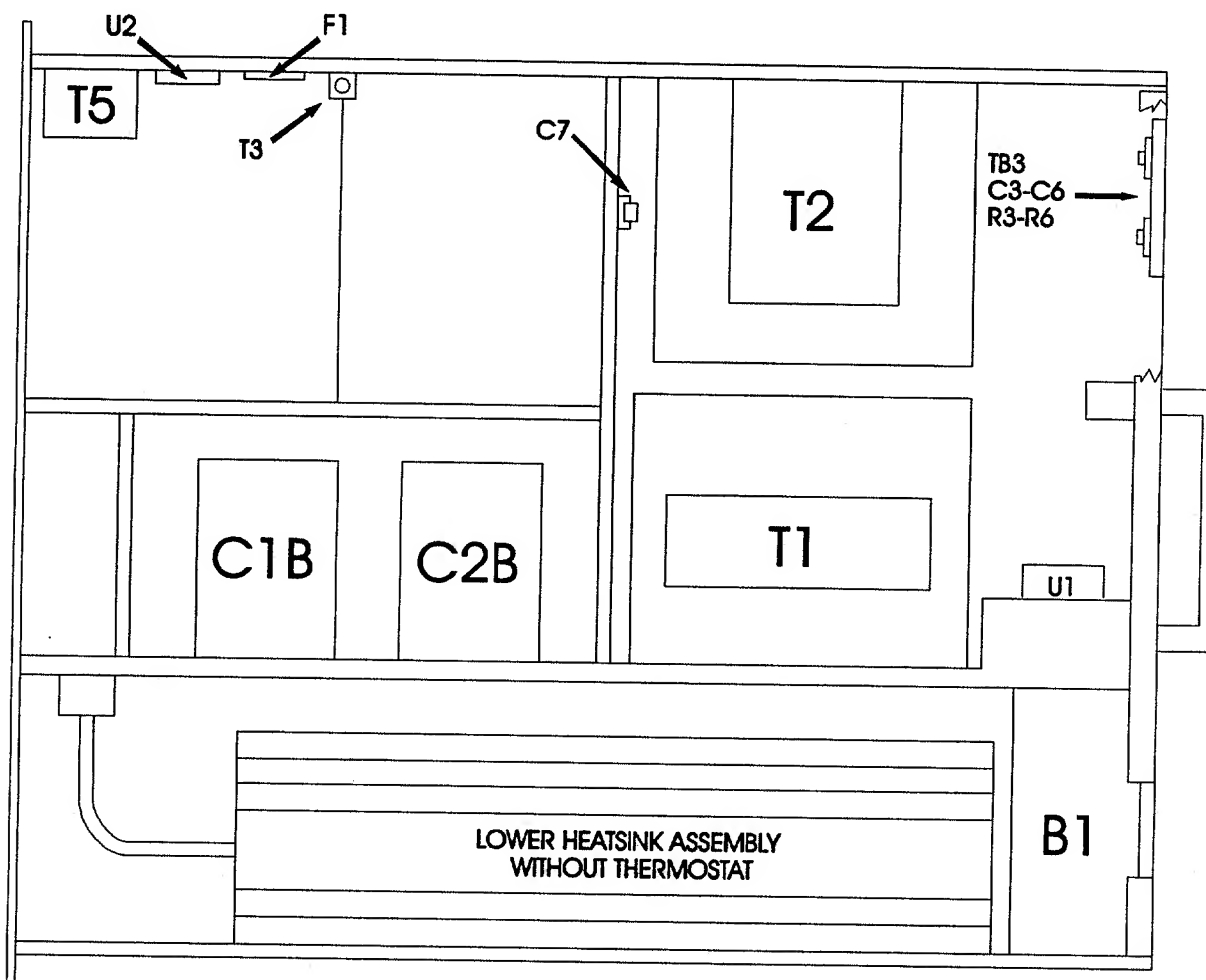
Model 1751SLE (Bottom View, Cover Removed)
